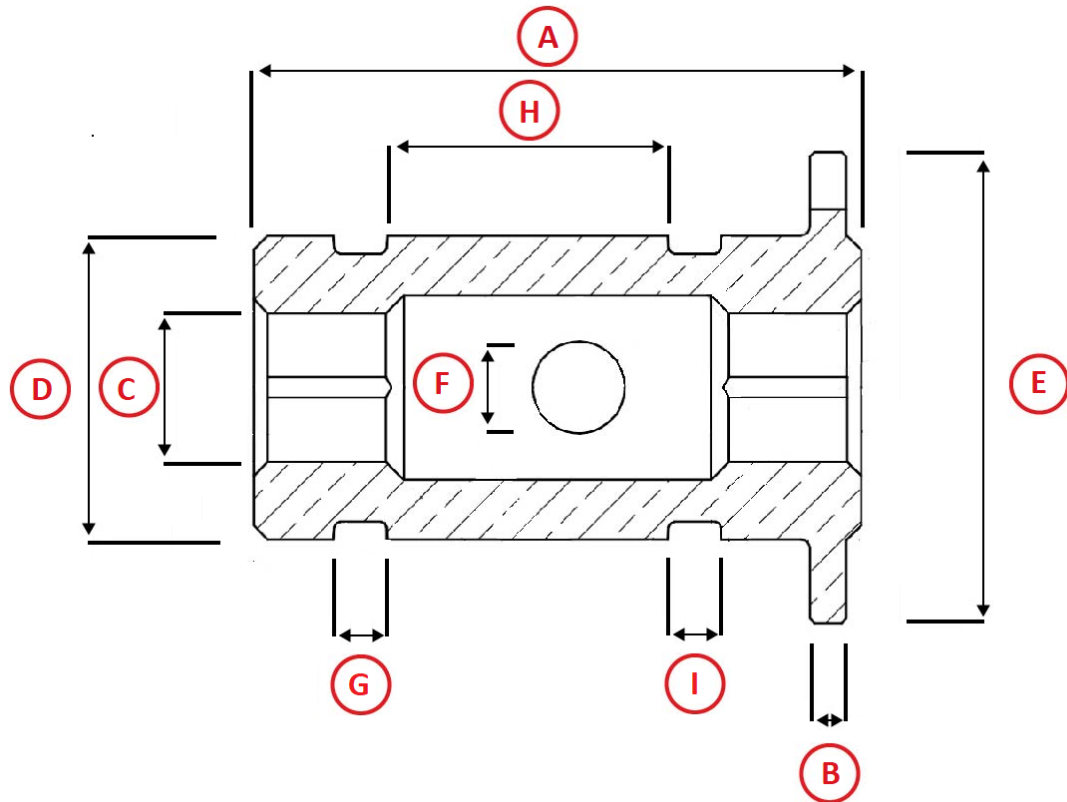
Tolerances verified in AUT1000 journal bearing production
